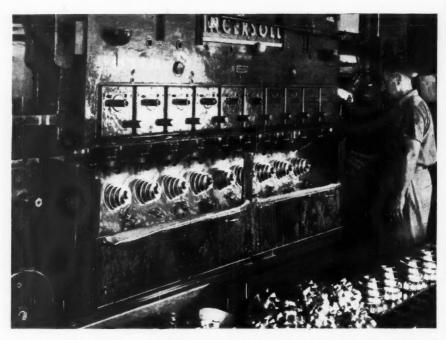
Special-Design Ingersoll 10-Spindle Milling Machine milling a constant tooth in a conical helix on each side of 10 pieces, machining the 10 simultaneously.
